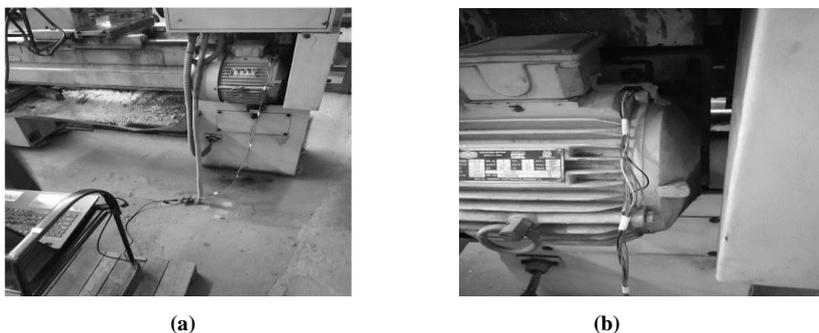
(a) Experimental setup of Centre lathe and (b) Mounting of the accelerometer
